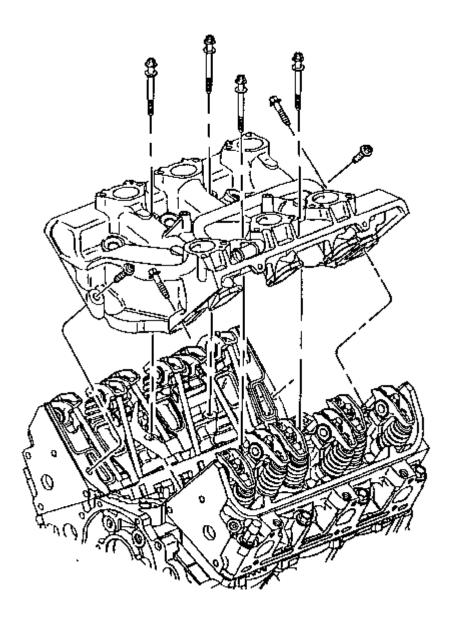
View Of Lower Intake Manifold & Bolts Courtesy of GENERAL MOTORS CORP.
